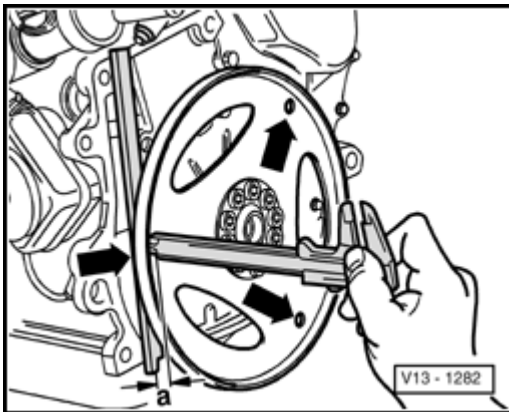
Checking Dimension Through 3 Holes For Securing Torque Converter Using A Straight Edge And Depth Gauge And Calculate Average
